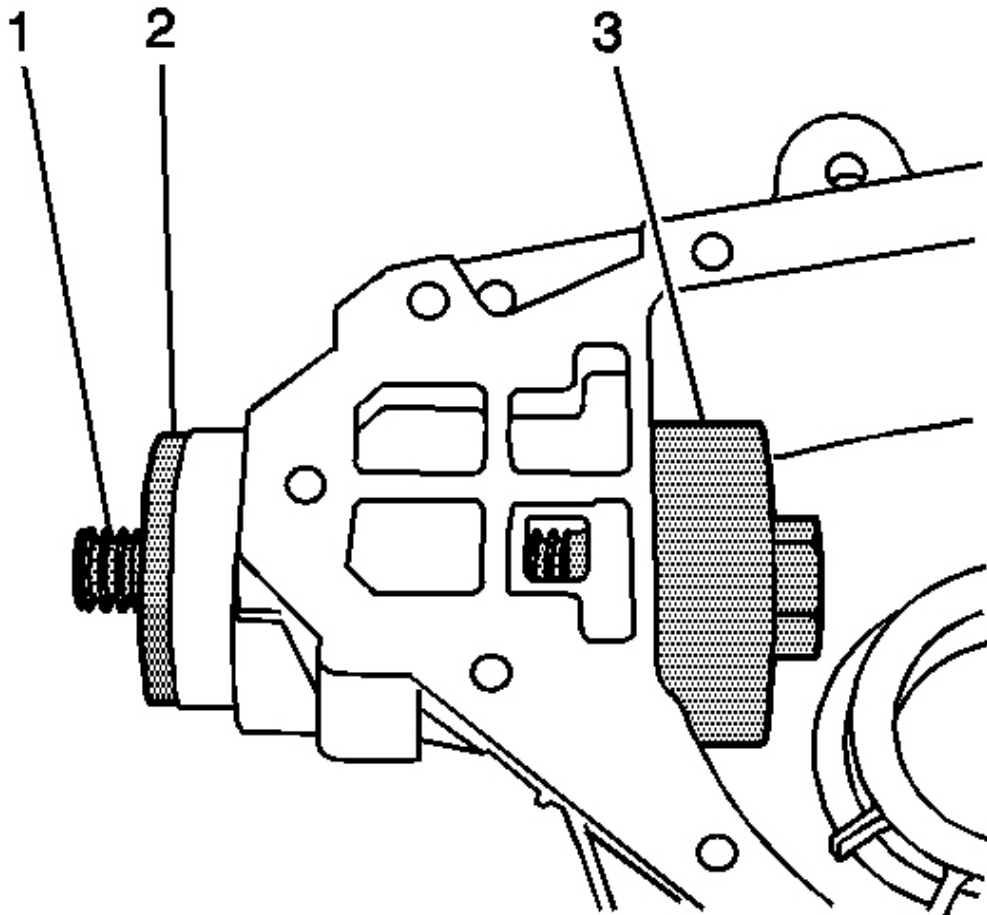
J 45228-1, J 45228-2 And J 45228-5 Installed Into Pinion Bearing Cup Bore
